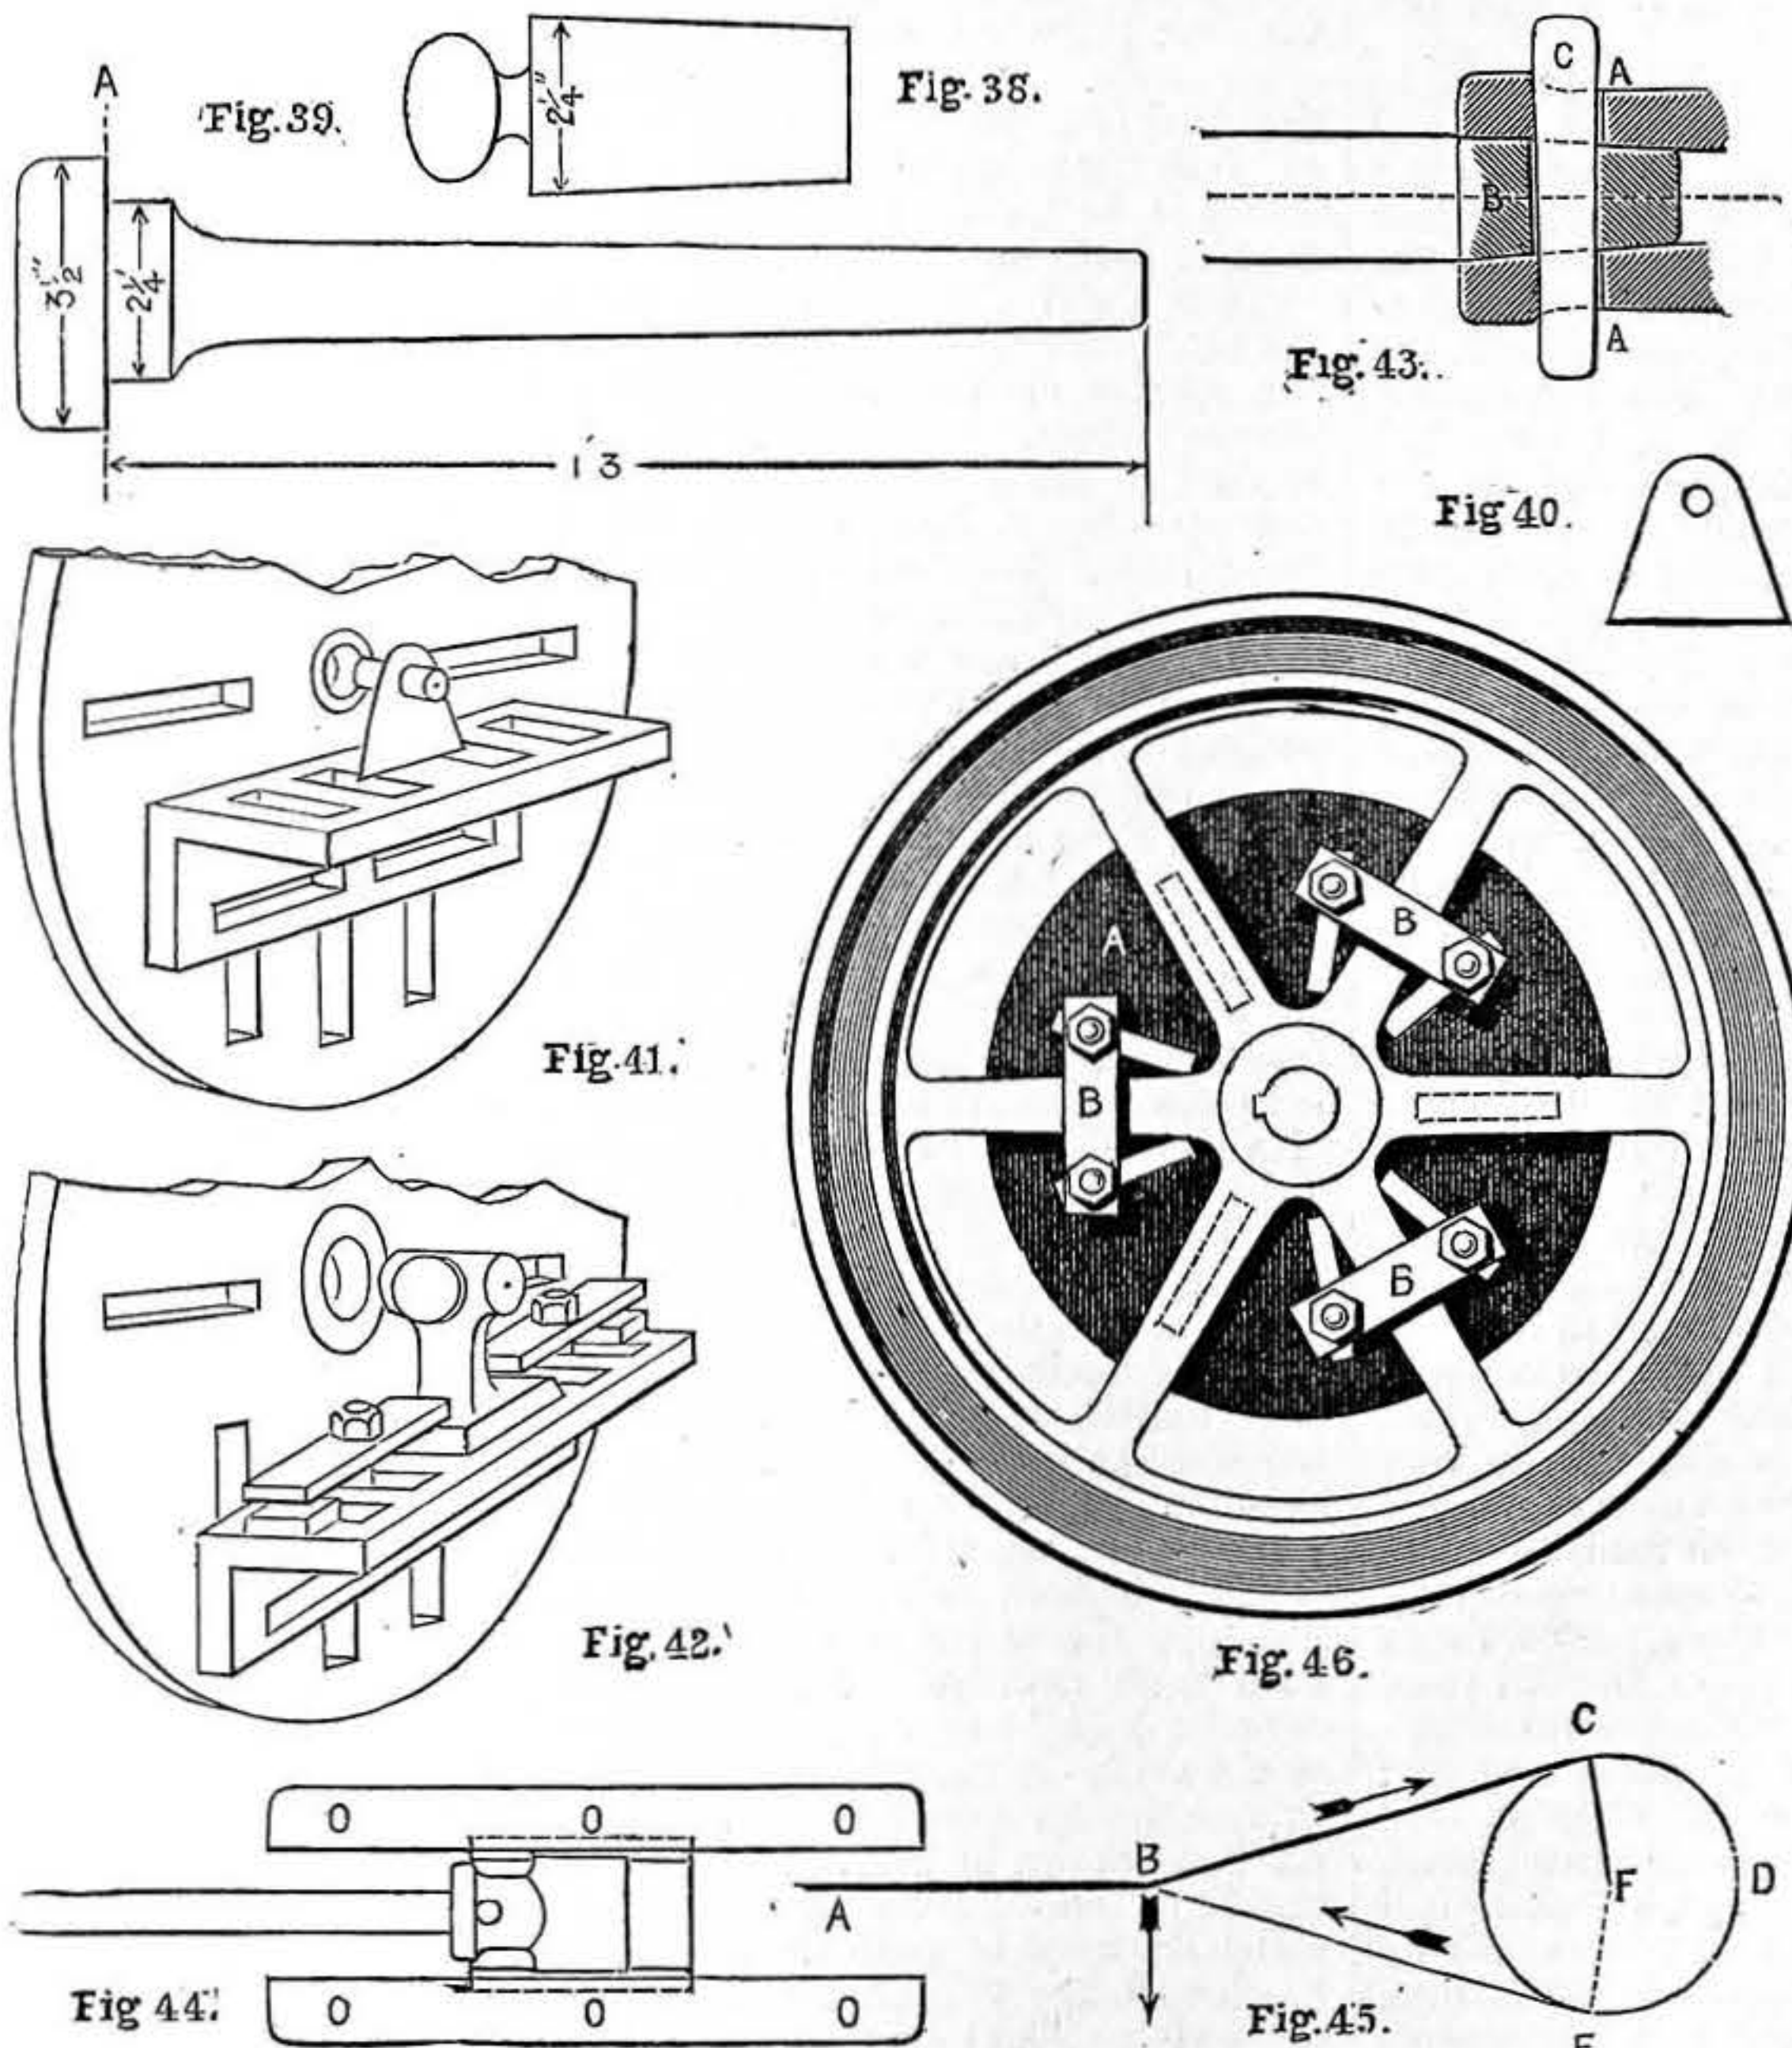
Wooden Plug for trying Hole in Bed-plate. Fig. 39.—Wooden Template for testing Bed-plate. Fig. 40.—Template. Fig. 41.—Mode of using Template to set Angle-plate to exact height. Fig. 42.—Mode of chucking Cross-head. Fig. 43.—Mode of securing Piston-rod into Cross-head. Fig. 44.—How Chamfers on Cross-head are tested for Parallelism. Fig. 45.—Diagram to explain Action of Connecting-rod on Guide. Fig. 46.—Mode of chucking the Fly-wheel.
